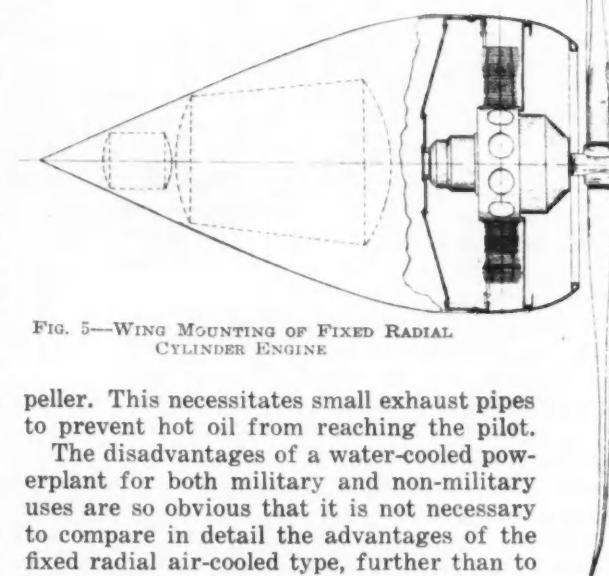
WING MOUNTING OF FIXED RADIAL CYLINDER ENGINE
